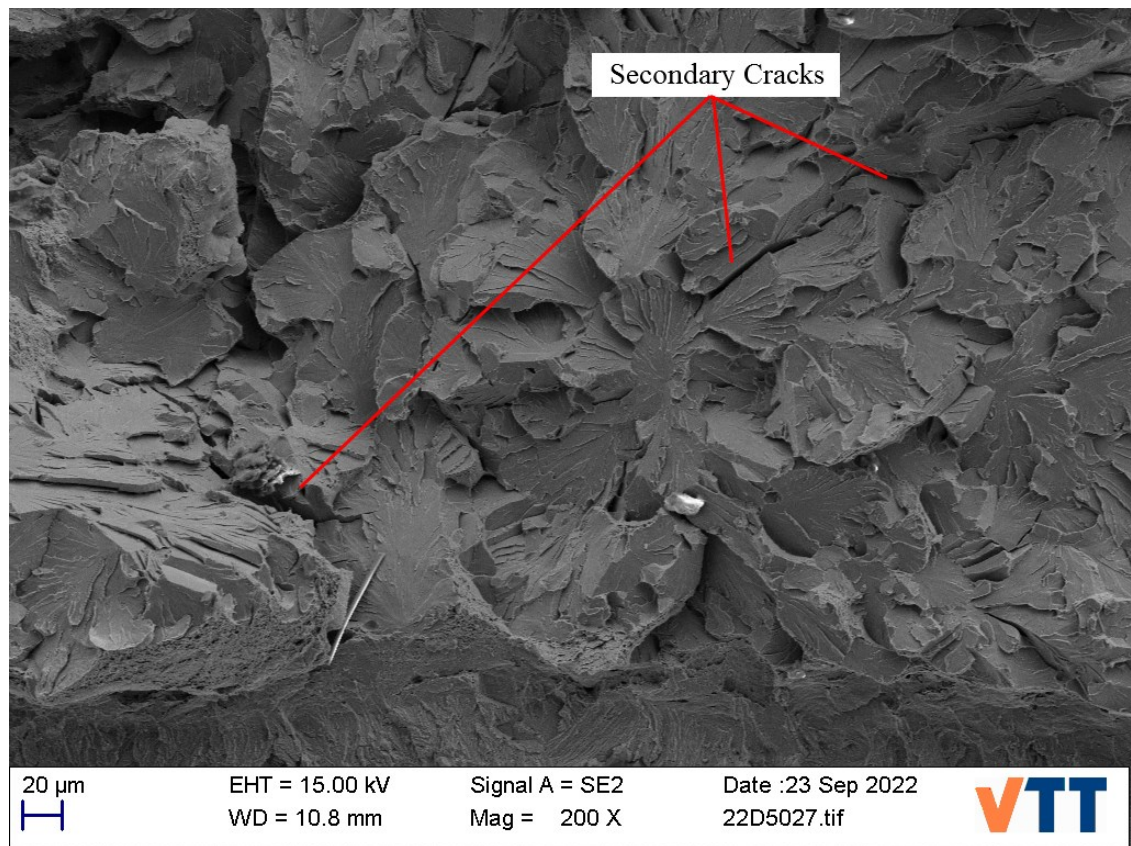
Secondary cracks highlighted with on the fracture surface, more are present but not indicated.
